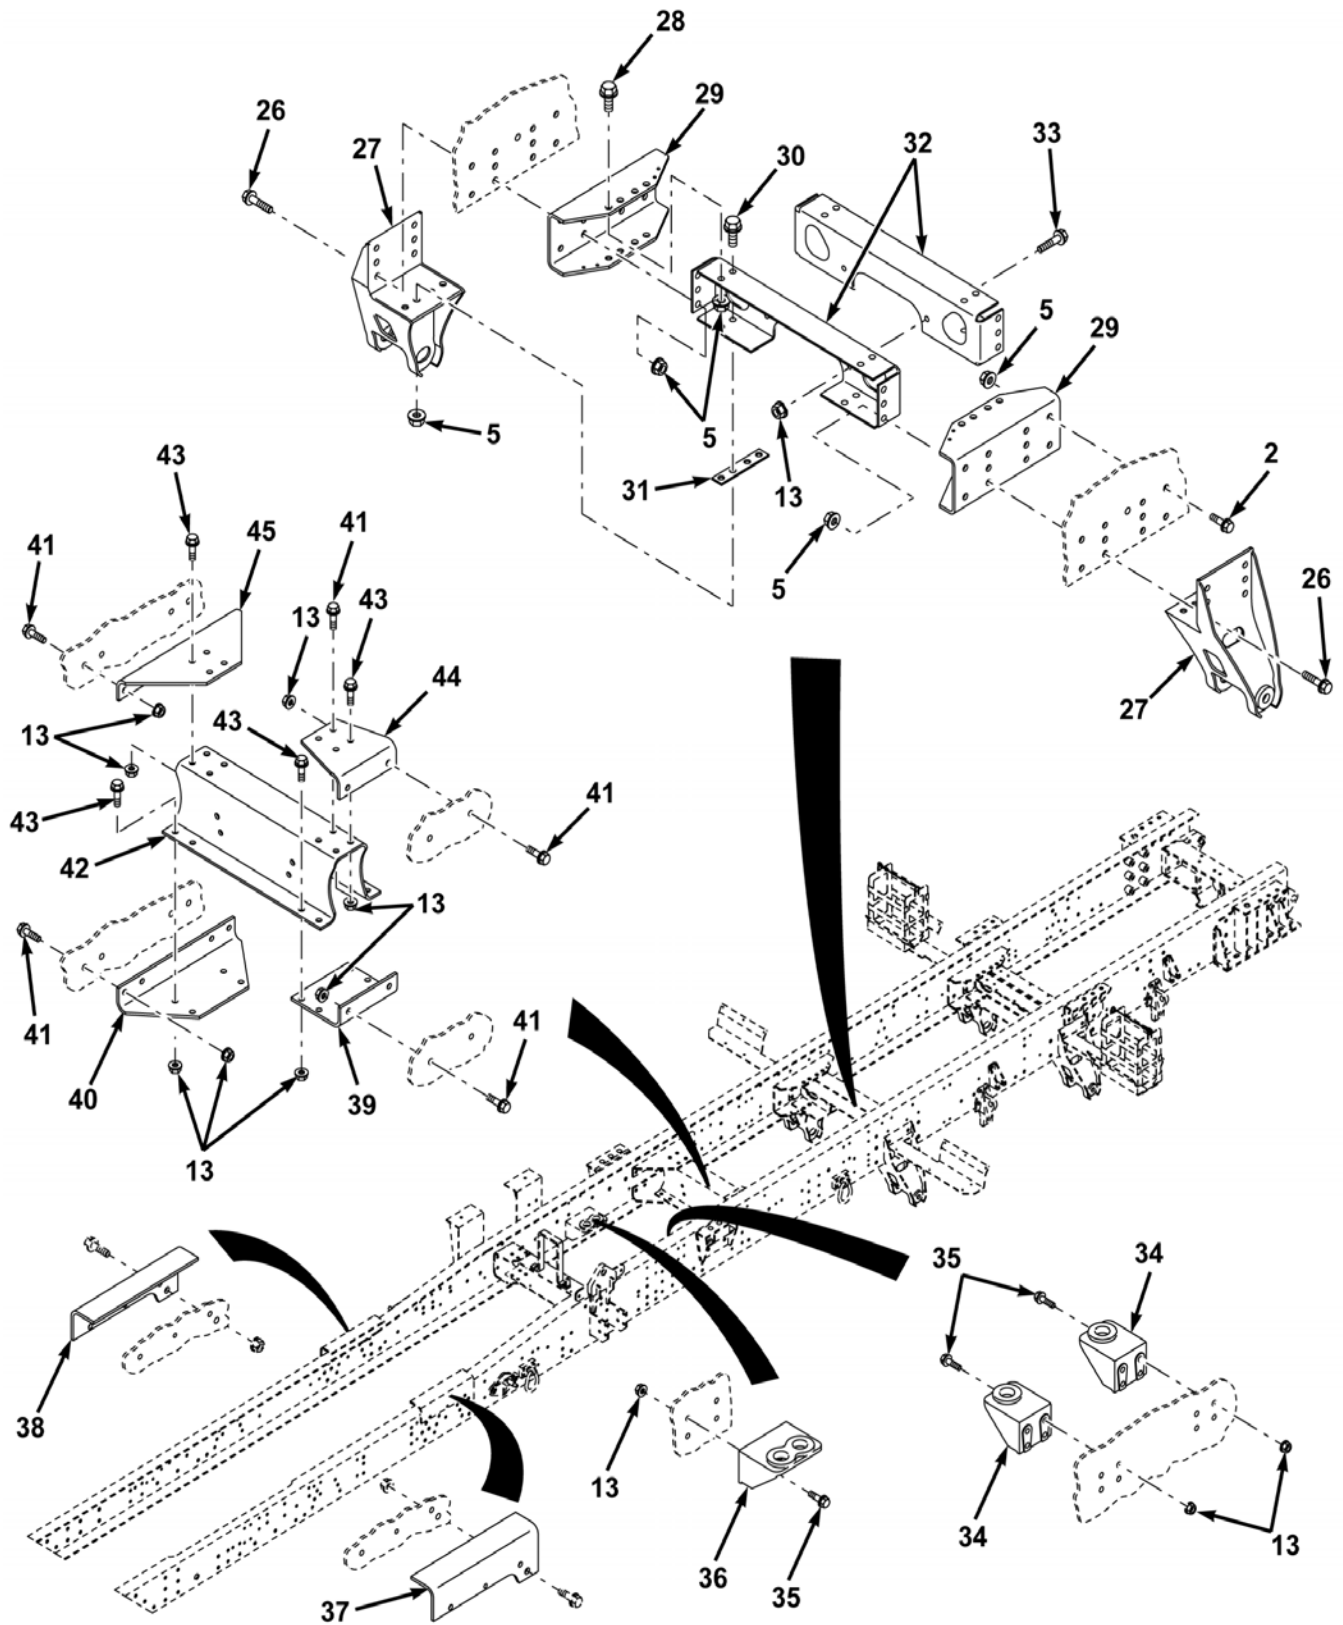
FRAME ASSEMBLY (SHEET 2 OF 5)
